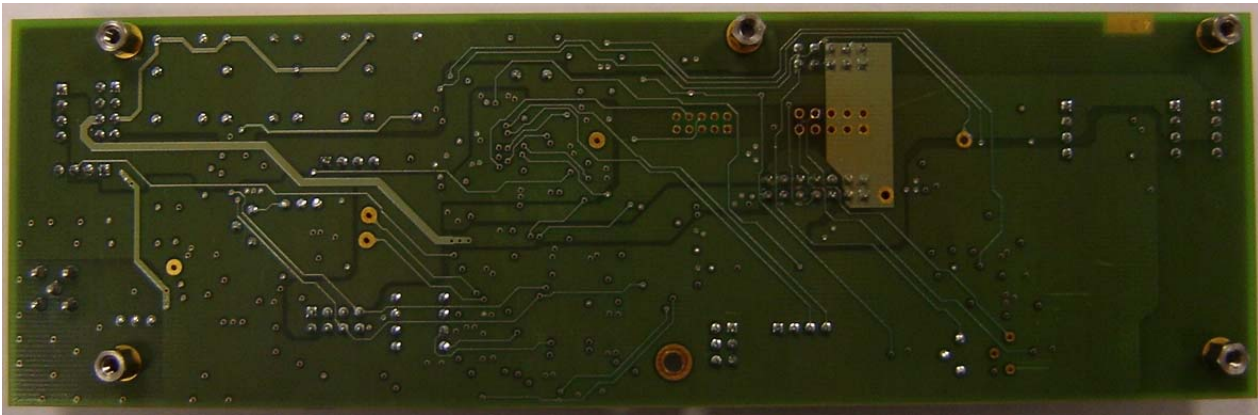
RF HEAD CTRL PCBA 902-C145-01B Bottom
